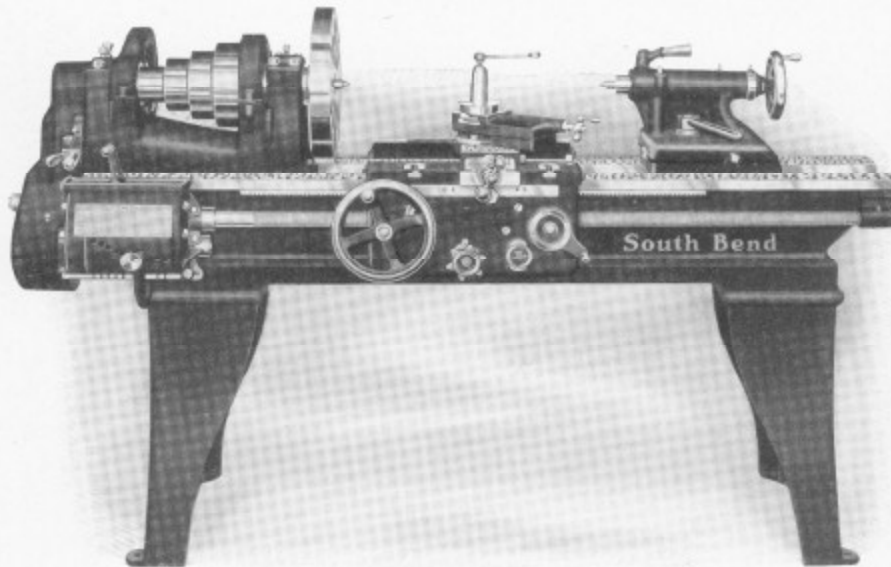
16-inch Quick Change, Back Geared, Screw Cutting Lathe
